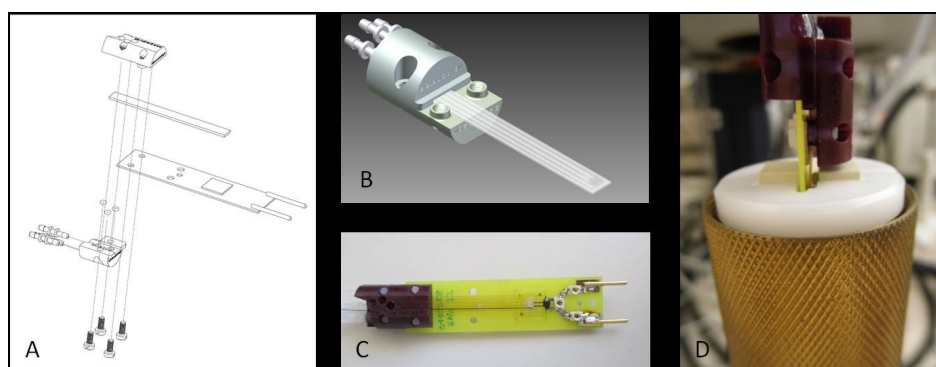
(a) View of the device parts assembly. (b) Cell culture chip packaged with microfluidic connections. (c) The PCB is screwed to the packaging to place the microcoil in close contact with the cell culture microchamber. (d) The system is mounted inside the NMR sensor.
